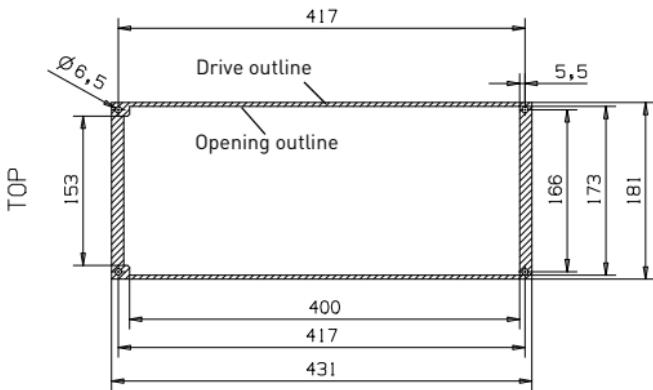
Flange mounting cutout dimensions for MI5 (unit of measure: mm)
